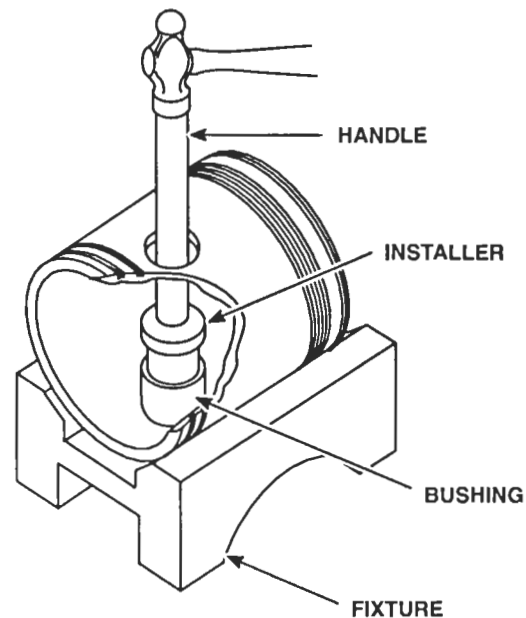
Removing or Installing Piston Pin Bushings in Piston
